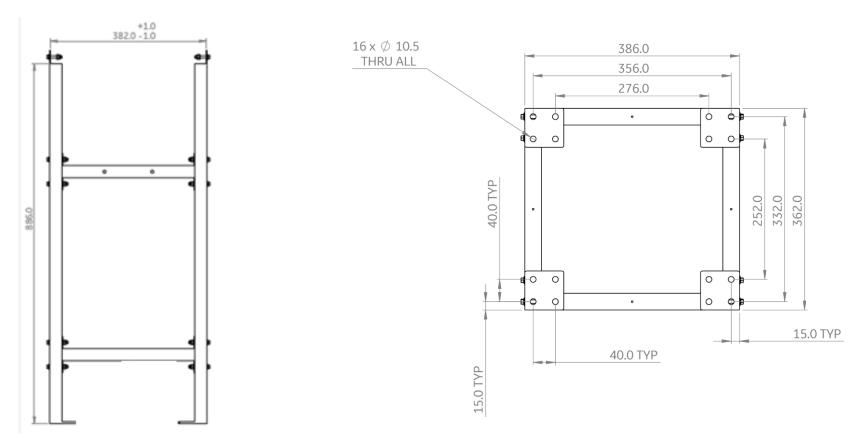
Mounting stand dimensions - front view Figure F-3: Mounting stand dimensions - footprint
